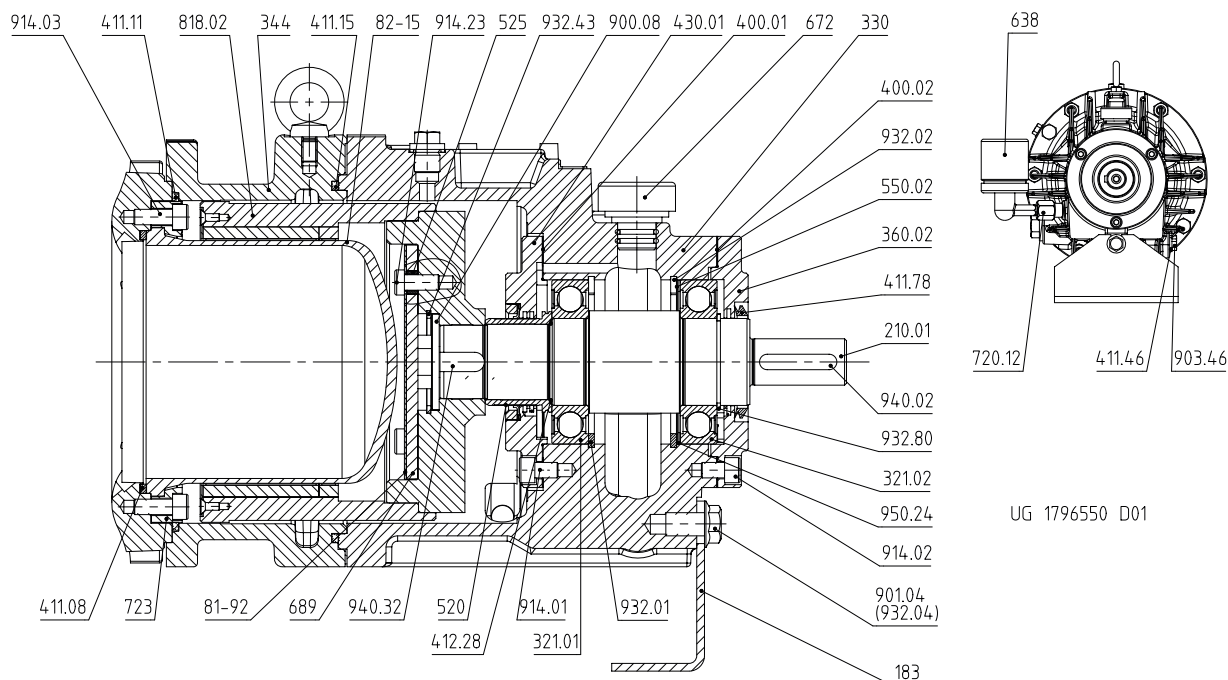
Model with bearing bracket with oil lubrication and shaft seal ring as leakage barrier
